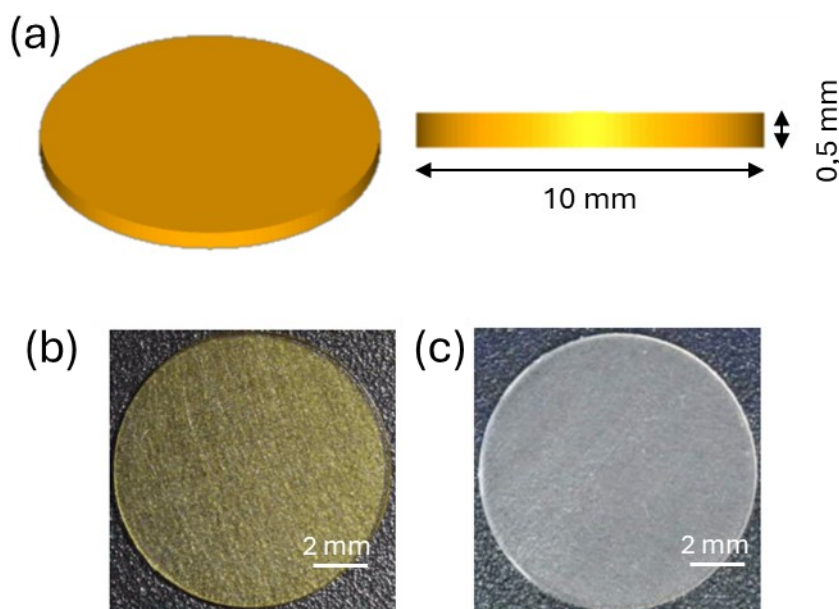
(a) CAD of the simple disk. Picture of the printed samples: MIP (a) and NIP (c) respectively.
